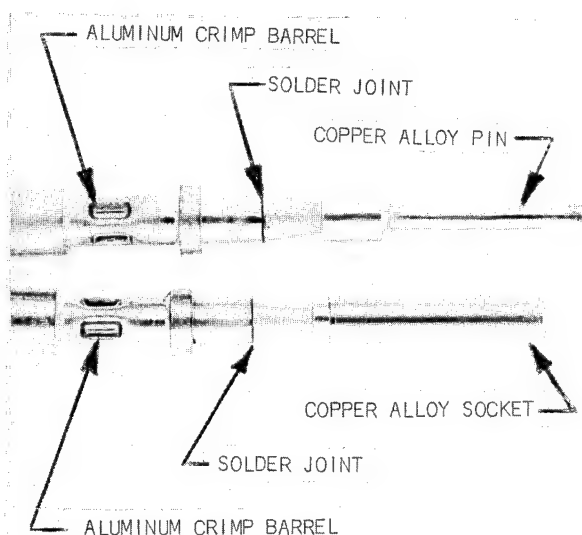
PIN AND SOCKET CONTACTS FOR MIL-C-26482 OR MIL-C-26500 CONNECTOR SHOWN CRIMPED TO ALUMINUM WIRE
